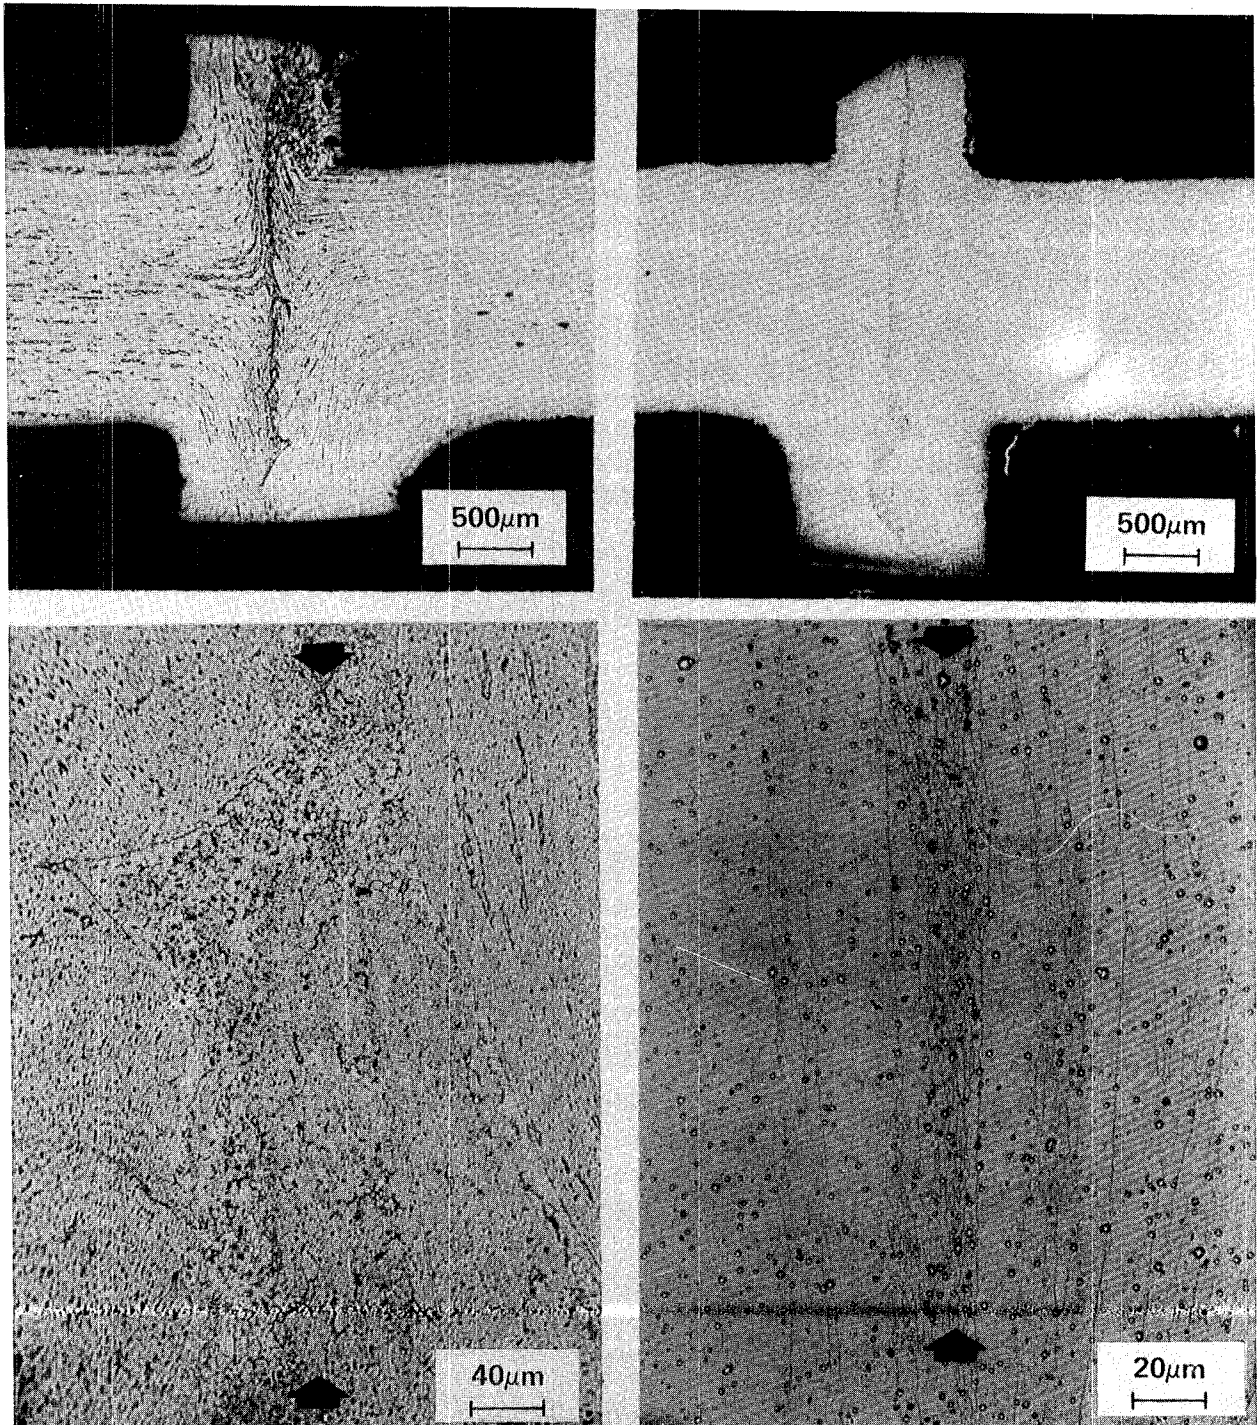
Flash Butt Welds (arrows show weld interface)
